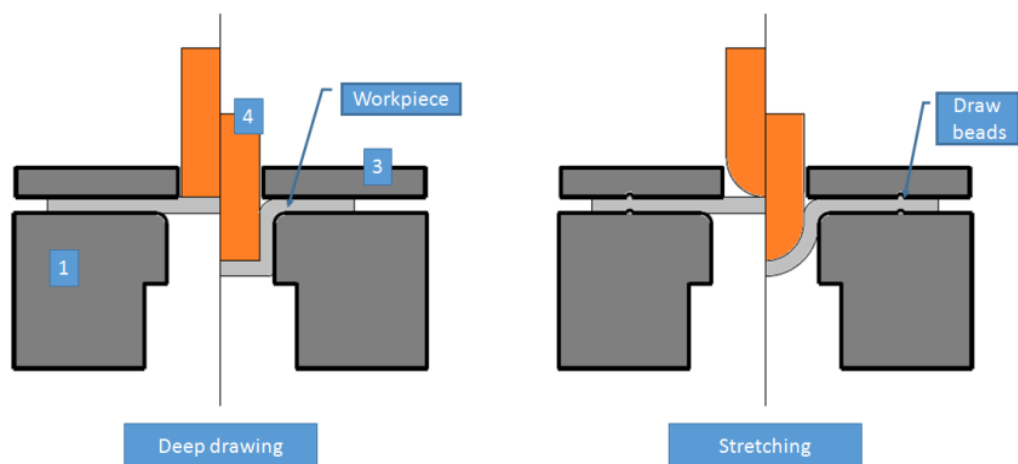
Schematic illustration of deep drawing and stretch forming operation. Common features: 1-Die, 2-workpiece, 3-blank holder, 4-punch and 5:draw beads [4].
